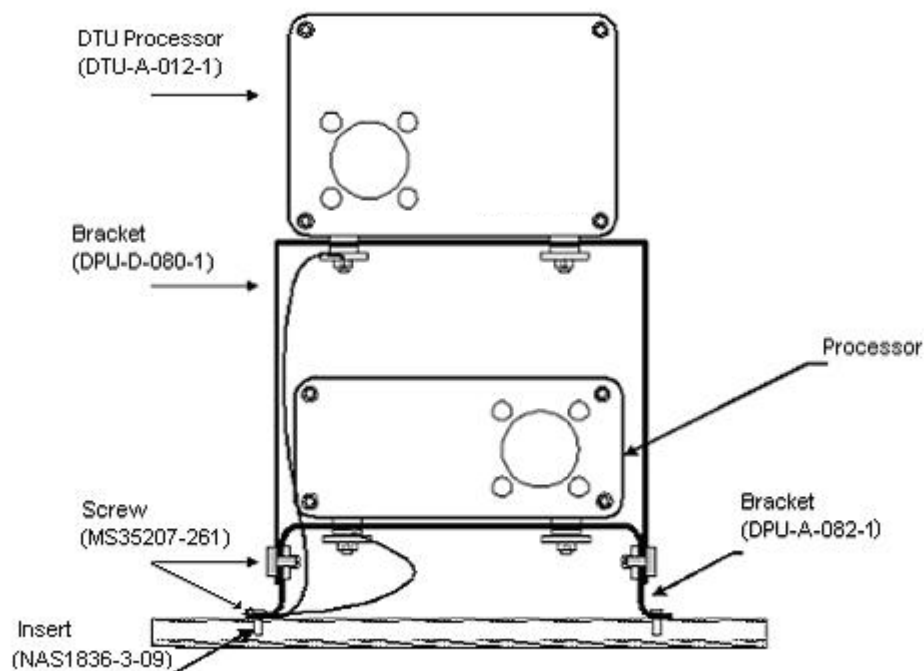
"Double Stack" Mounting Configuration – Honeycomb/Sandwich Panel
